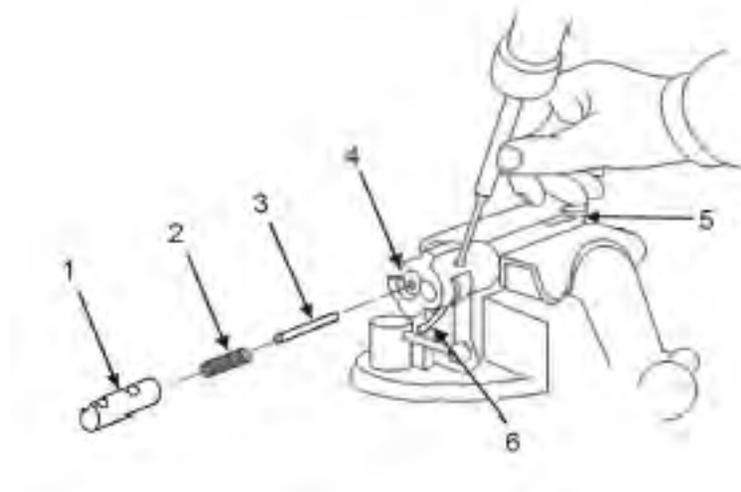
Bolt Assembly in Vise with Cam Lobe.
